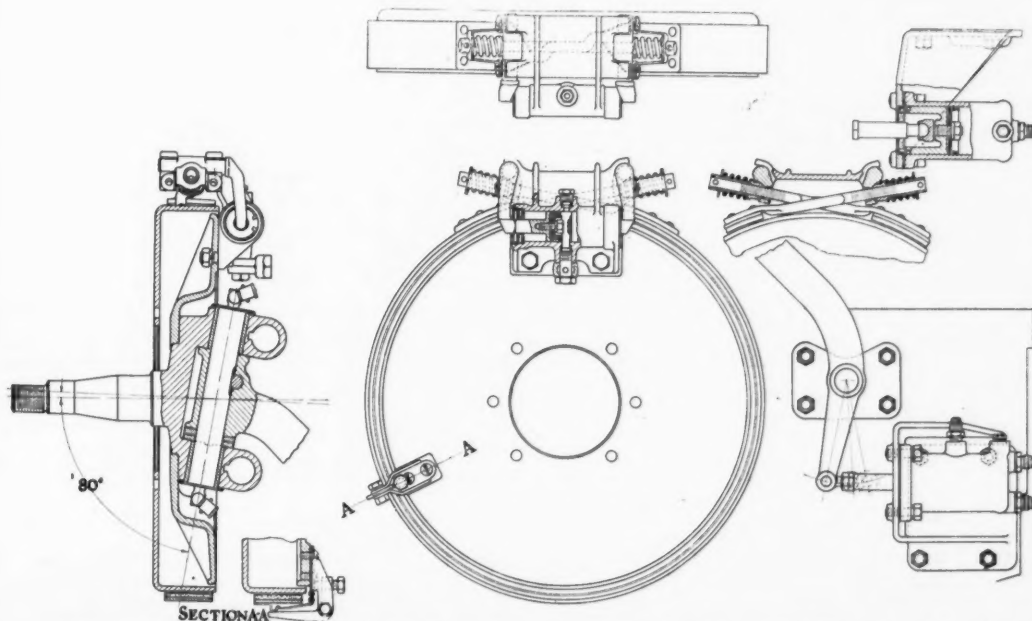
Four-wheel Hydraulic Brake Corp. contracting band type of front wheel brake. Master cylinder, operated by pedal, is shown at right
